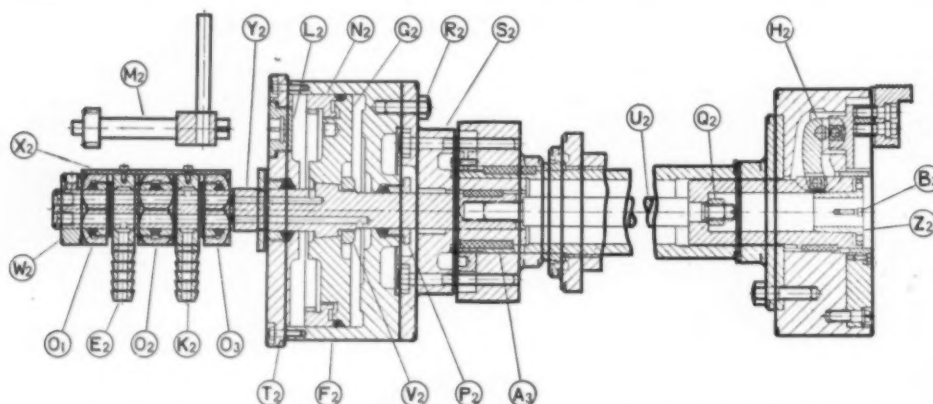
Actuating Mechanism of Herbert Air Chuck. Illustrates also the general method of actuating other work-holding devices.
